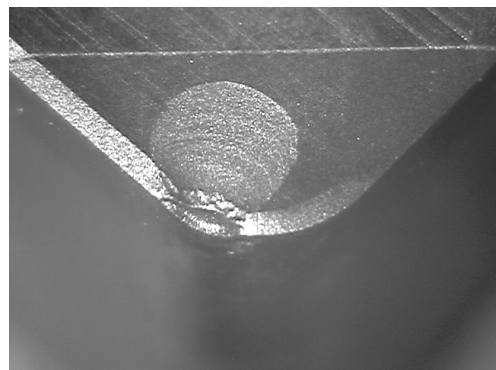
Tool failure on CBN cutting tool(feed rate = 0.157mm/rev, cutting depth = 0.1mm, cutting speed = 72m/min, Cutting volume = 2.7cm<sup>3</sup>)
